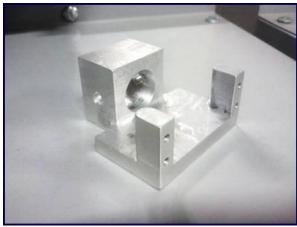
Linear actuator sleeve which secures the beamer module to the actuator
